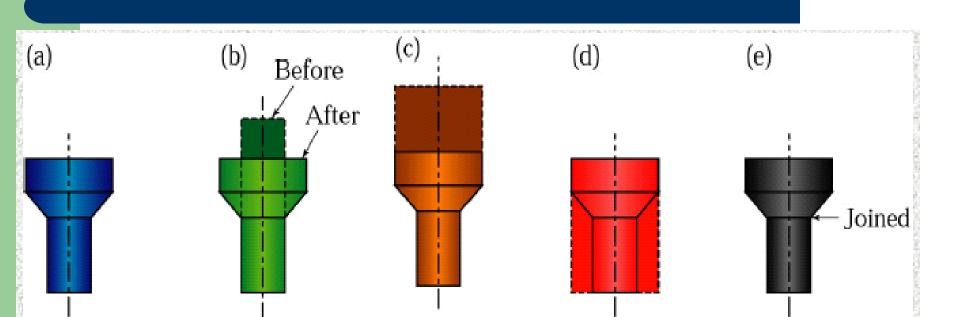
Various methods of making a simple part: (a) casting or powder metallurgy, (b) forging or upsetting, (c) extrusion, (d) machining, (e) joining two pieces.
